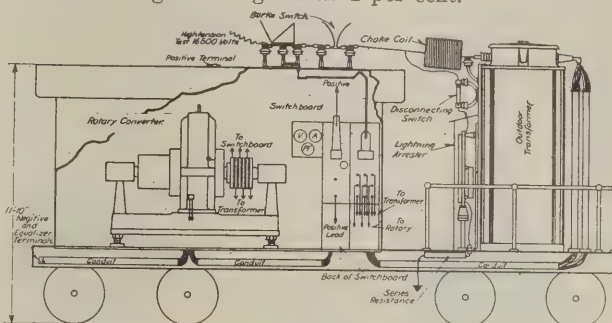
SECTIONAL ELEVATION OF OUTDOOR TRANSFORMER SUB-STATION.
